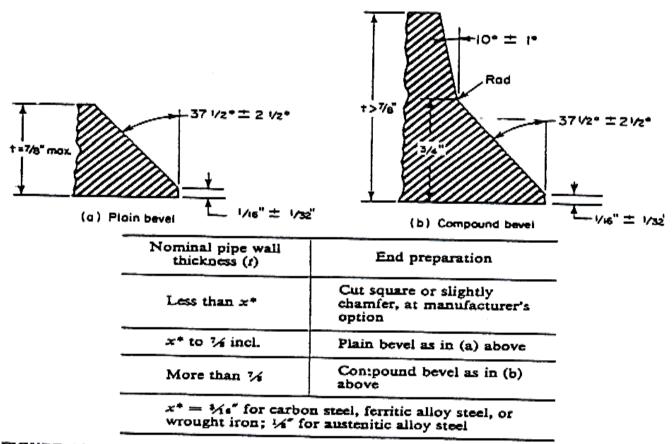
Basic welding bevel for all components (without backing ring, or with split ring).
